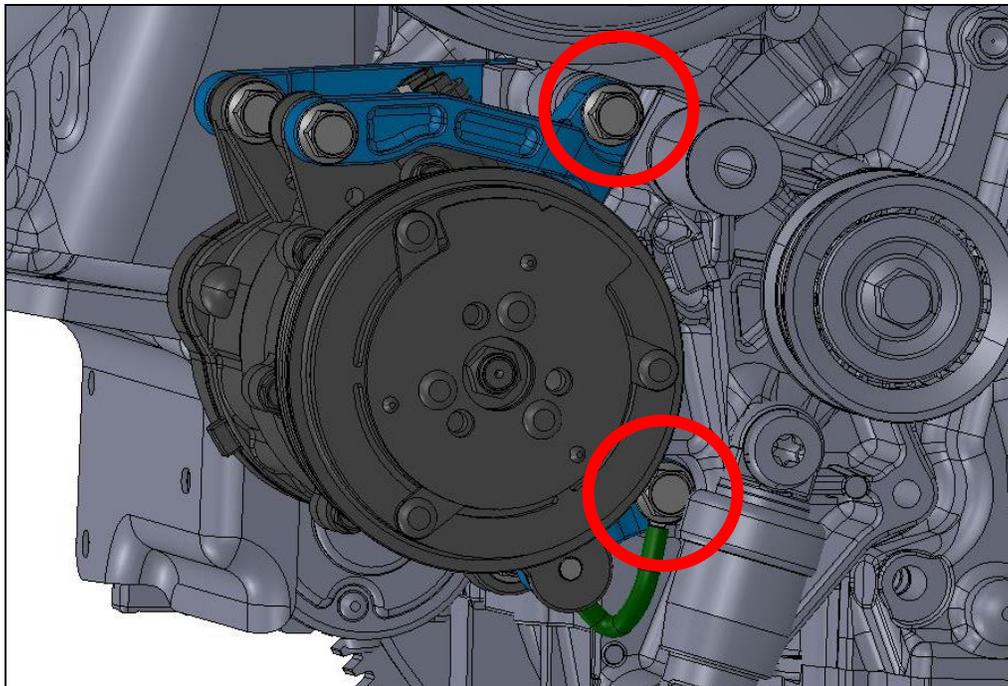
Upper bolt is an M8 x 1.25 x 100mm and lower bolt is M8 x 1.25 x 50mm. Ground strap is attached to lower mounting bolt as shown. Factory stud in lower mounting location if present can be reused or replaced with included flange bolt. Torque both bolts to 18 ft-lbs.
